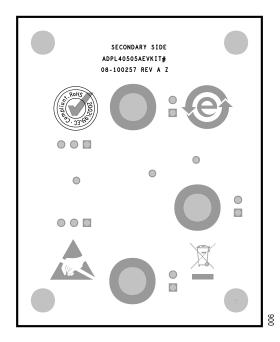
ADPL40505A EV kit Component Placement Guide—Bottom Silkscreen
